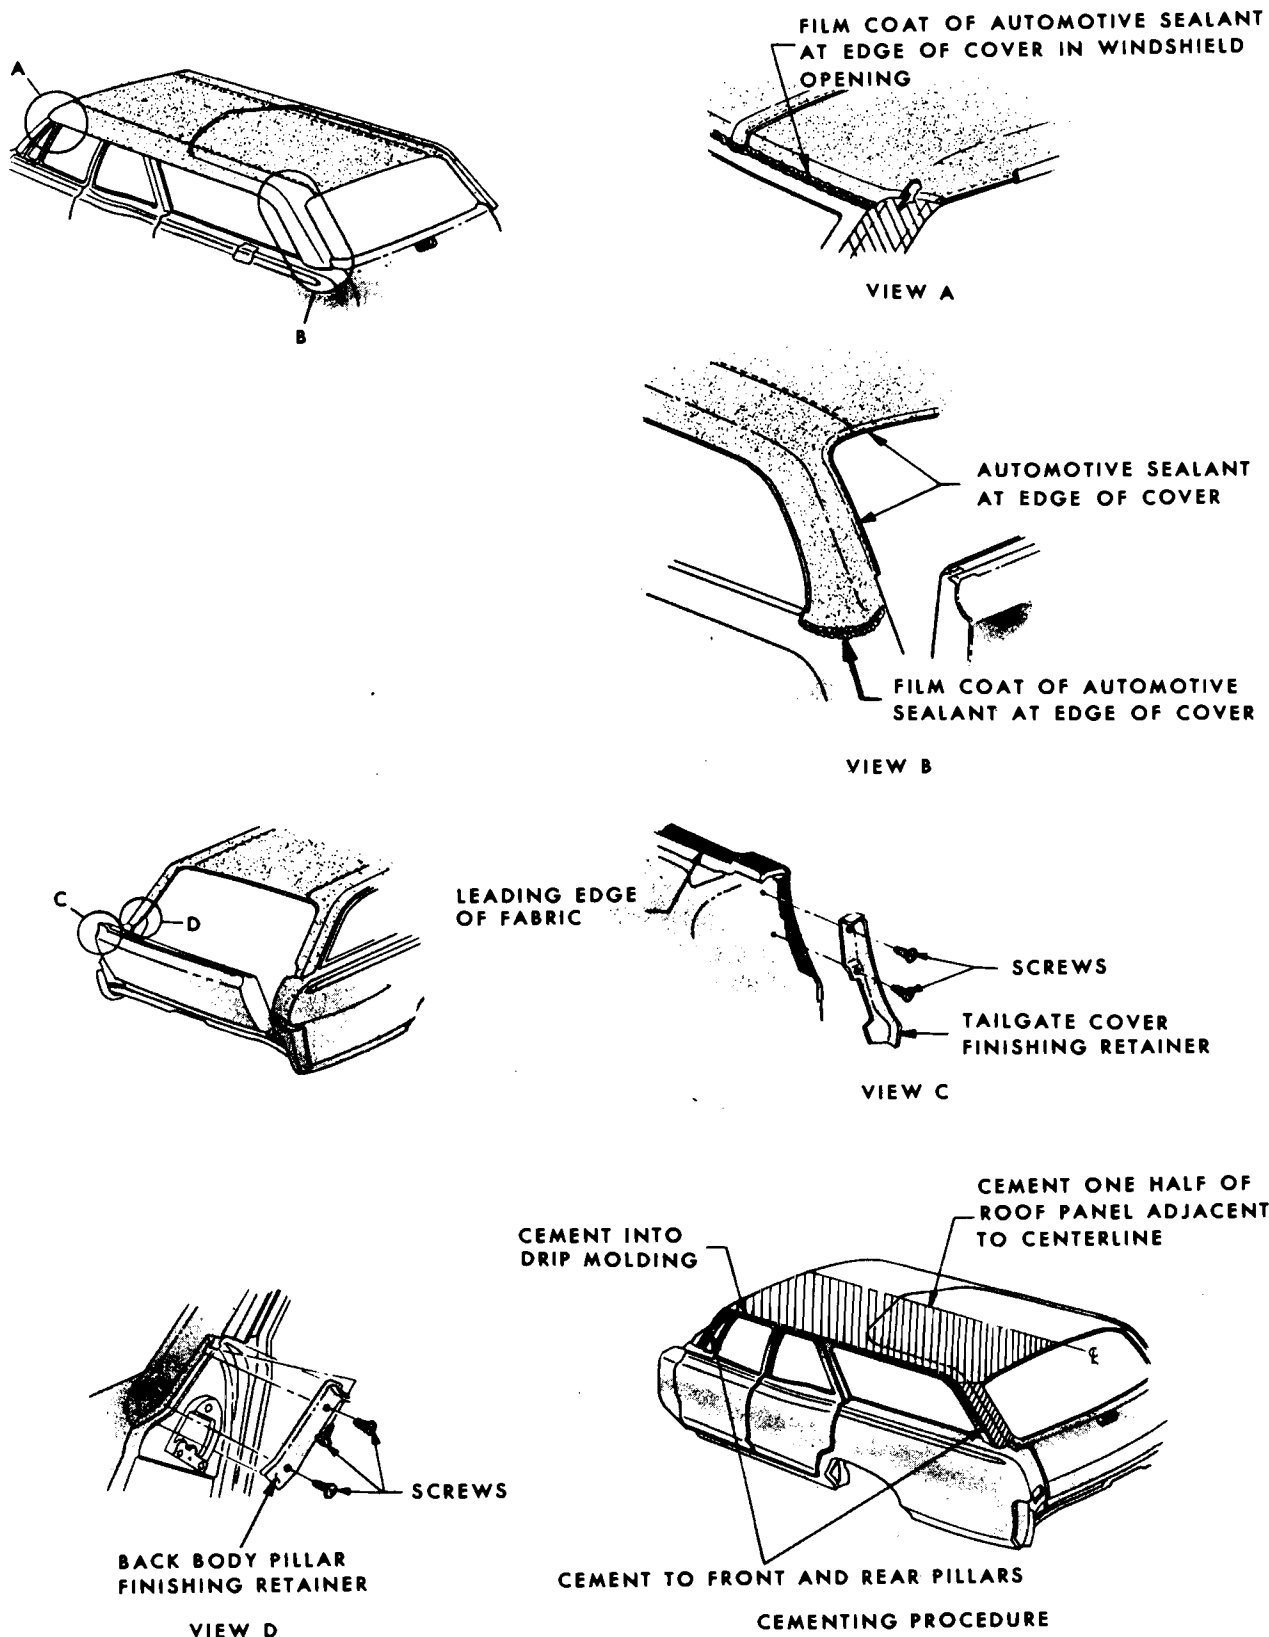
Typical Fabric Roof Cover Installation on Station Wagon Styles
